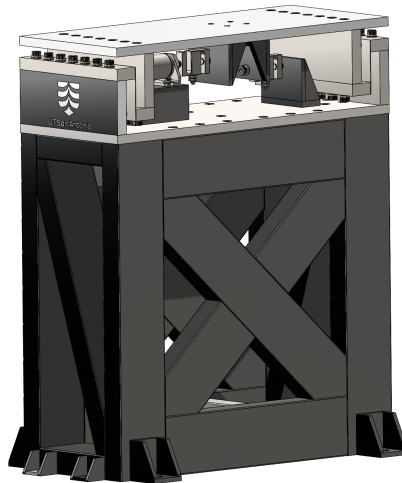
UT San Antonio FLARE test stand structure CAD rendering, assembled.
